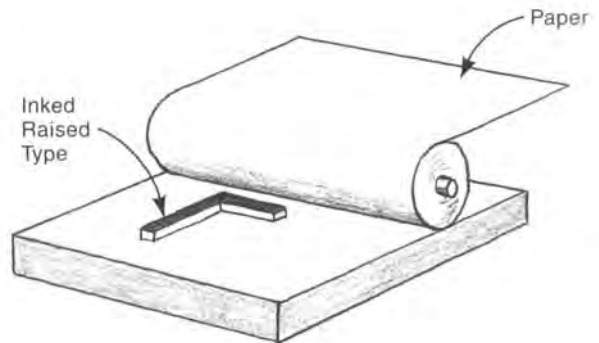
D1 The principle of letterpress printing. Raised type is coated on its top surface with ink that is transferred to the paper when the paper contacts the plate.
